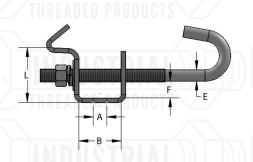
ADJUSTABLE ROD BEAM CLAMP
